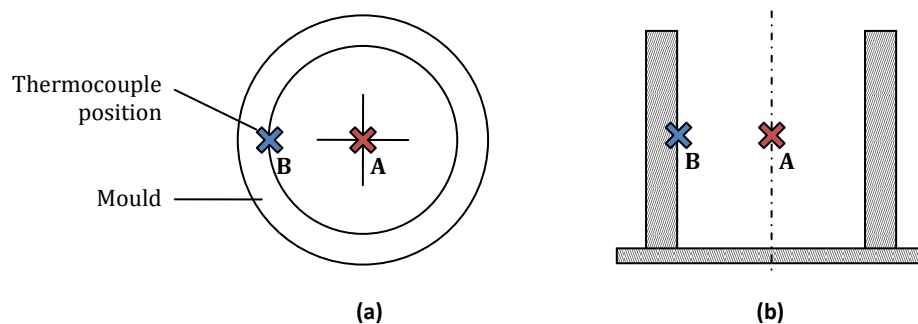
Top and cross-sectional view of the mould showing the positions of the thermocouple
